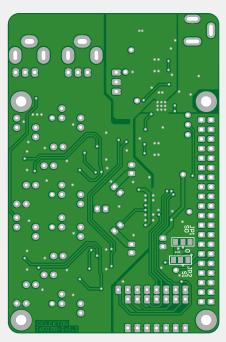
The bottom side of the PCB. Jumpers JP1 and JP2 can normally be omitted.
